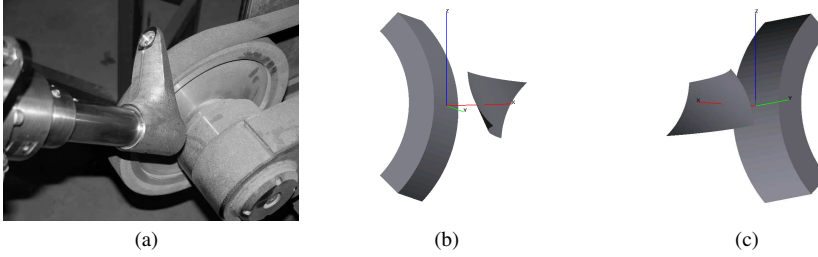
(a) A robot is pressing a workpiece (water tap) against the contact wheel of the belt grinding machine, (b),(c) quarter of the contact wheel, surface of the workpiece.
